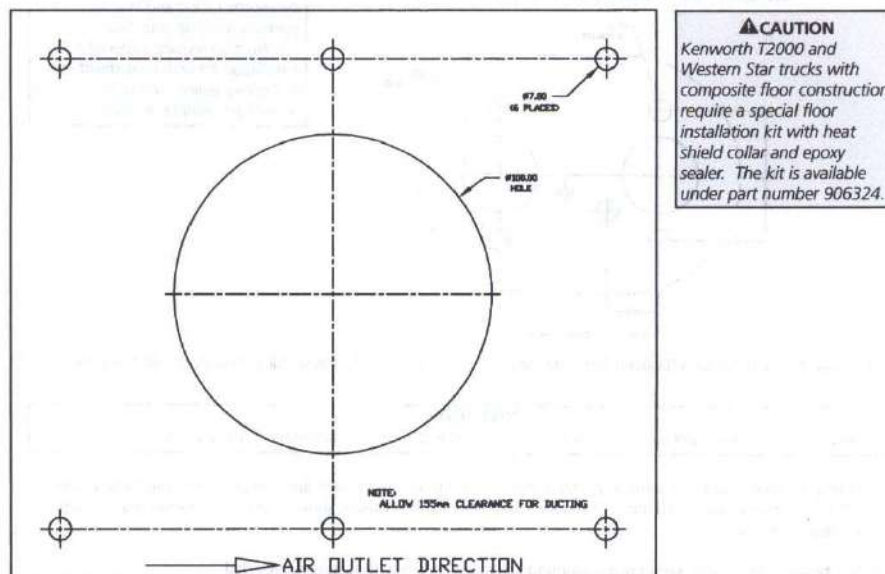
Example of Installation (Drilling) Template for Universal Mounting Plate - Not to Scale
